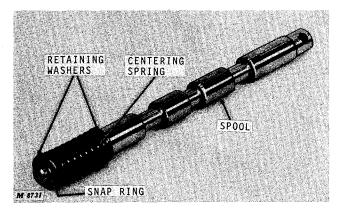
Removing Spool Centering Spring 90-Degree Unit
